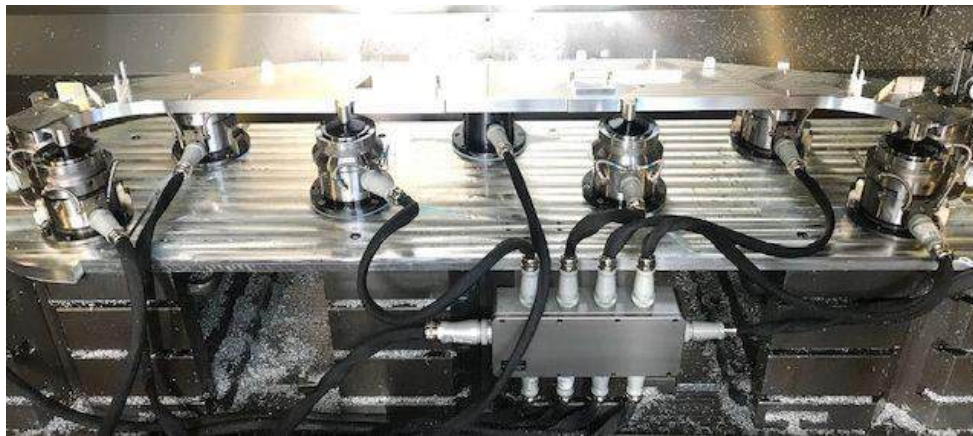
Milling test performed on the CNC machine - operation OP20.
